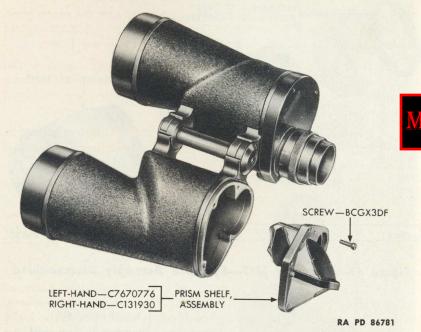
Binocular M17—Prism Shelf Assembly Removed
